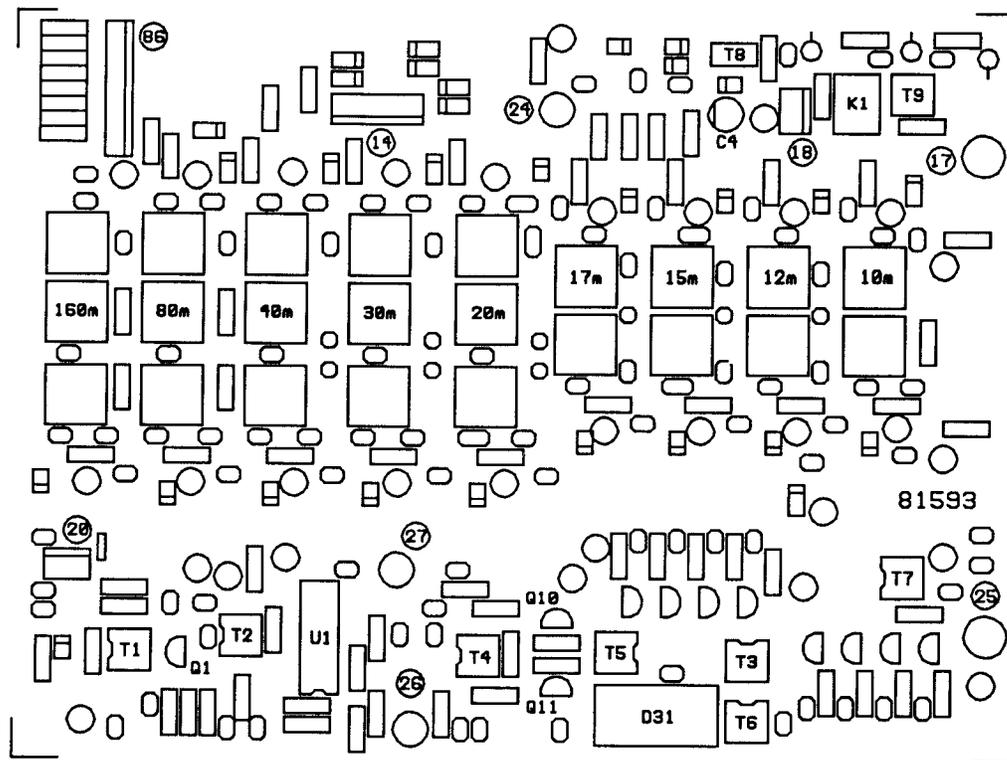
BPF / FRONT END BOARD COMPONENT LAYOUT (81593)
